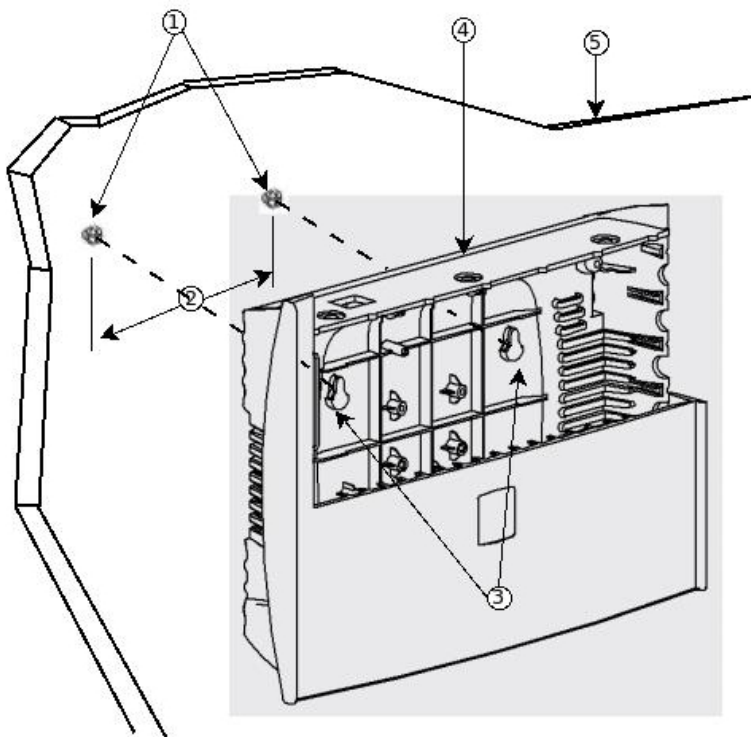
Wall-Mounting Features on the Teldat K/KF router
